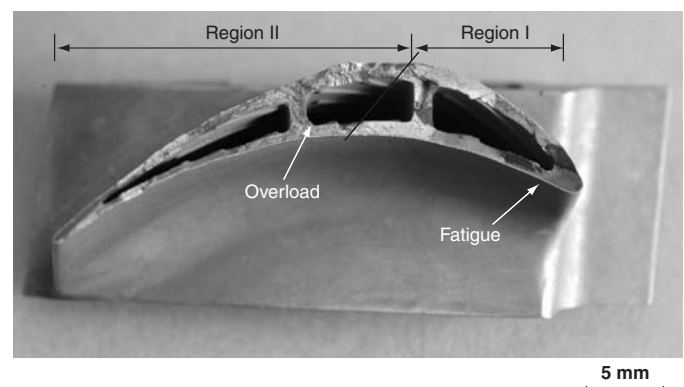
Fracture surface showing two fracture zones
